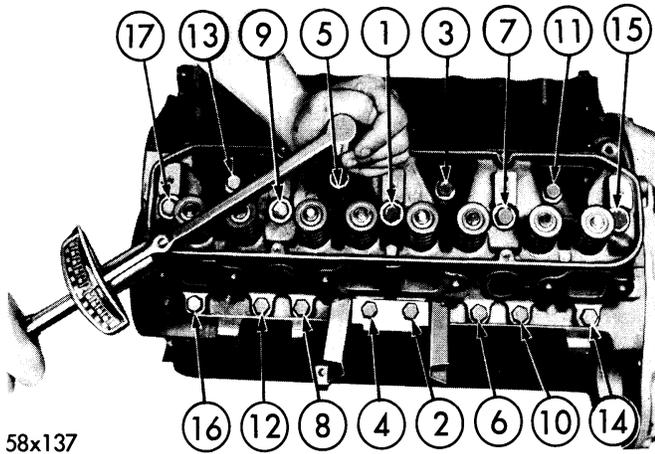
Sequence for Tightening Cylinder Head—V-8 Engine—350 Cubic Inch Engine
